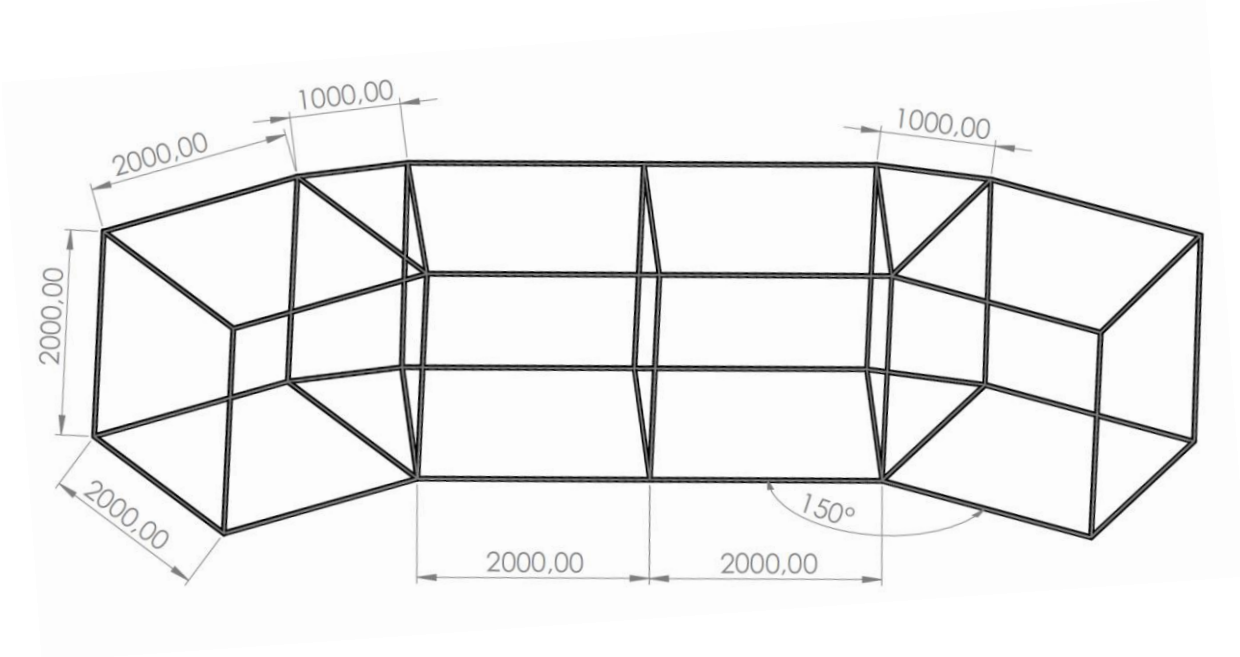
Technical Drawings and Dimensions of the Tunnel.
